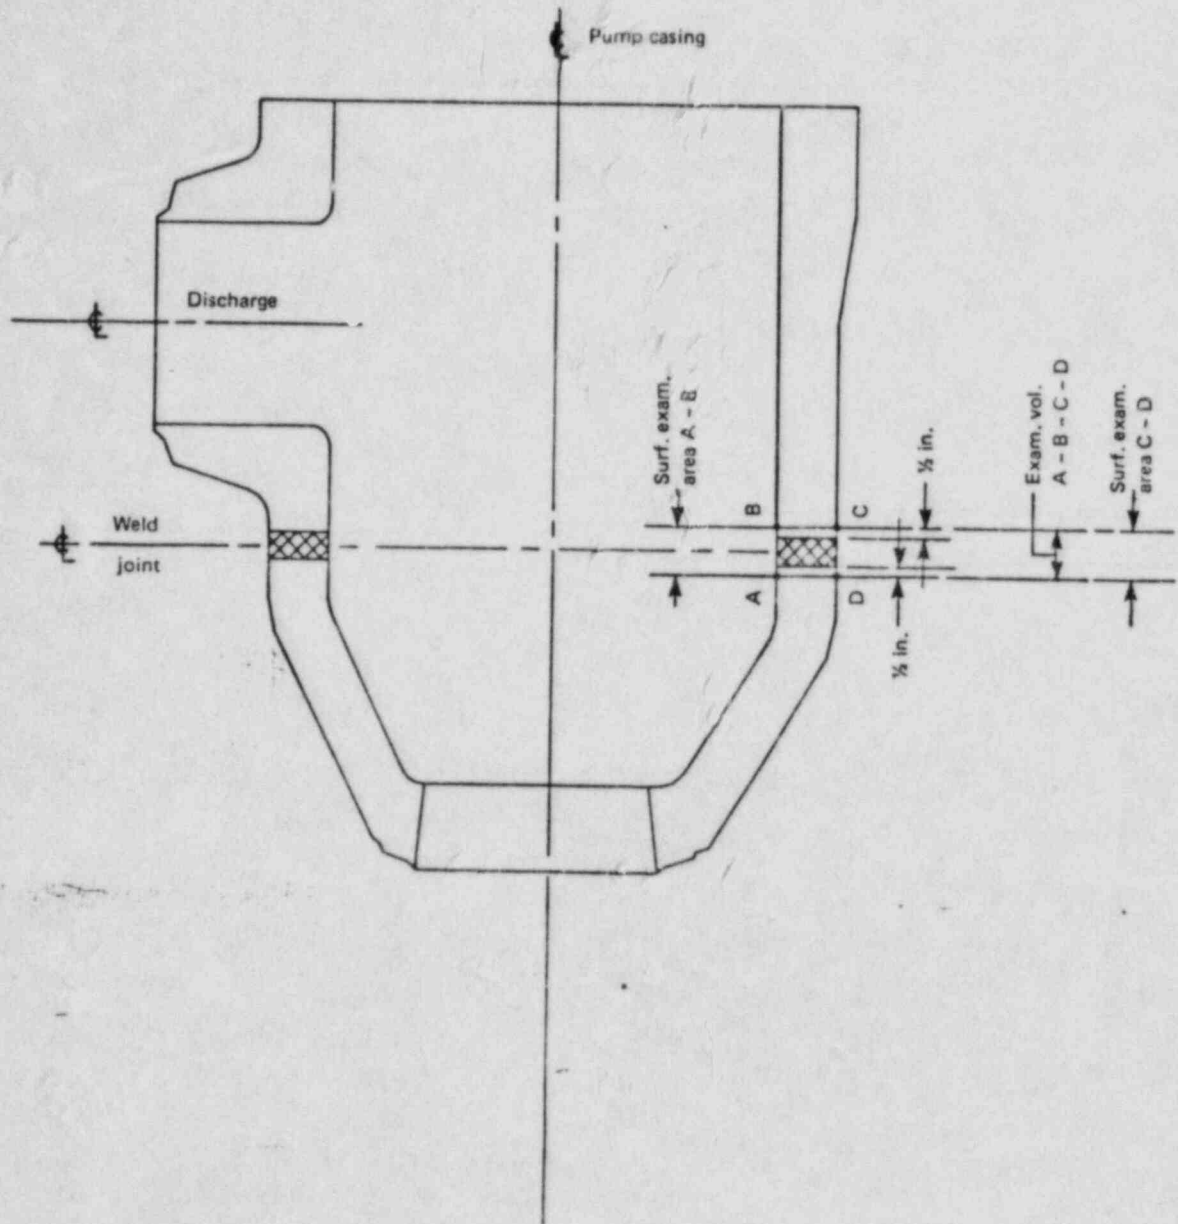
PUMP CASING WELD
